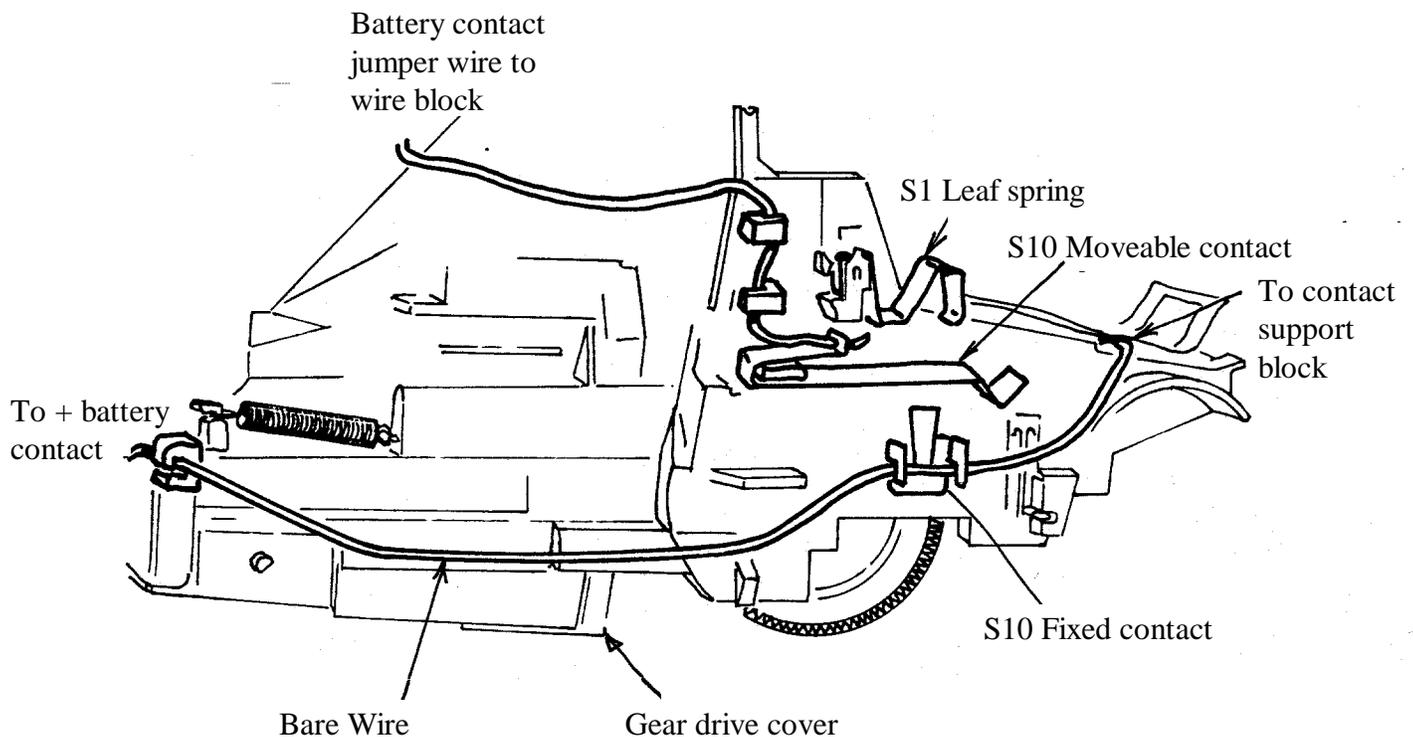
Disconnecting wires and removing parts from the Gear Drive Cover
